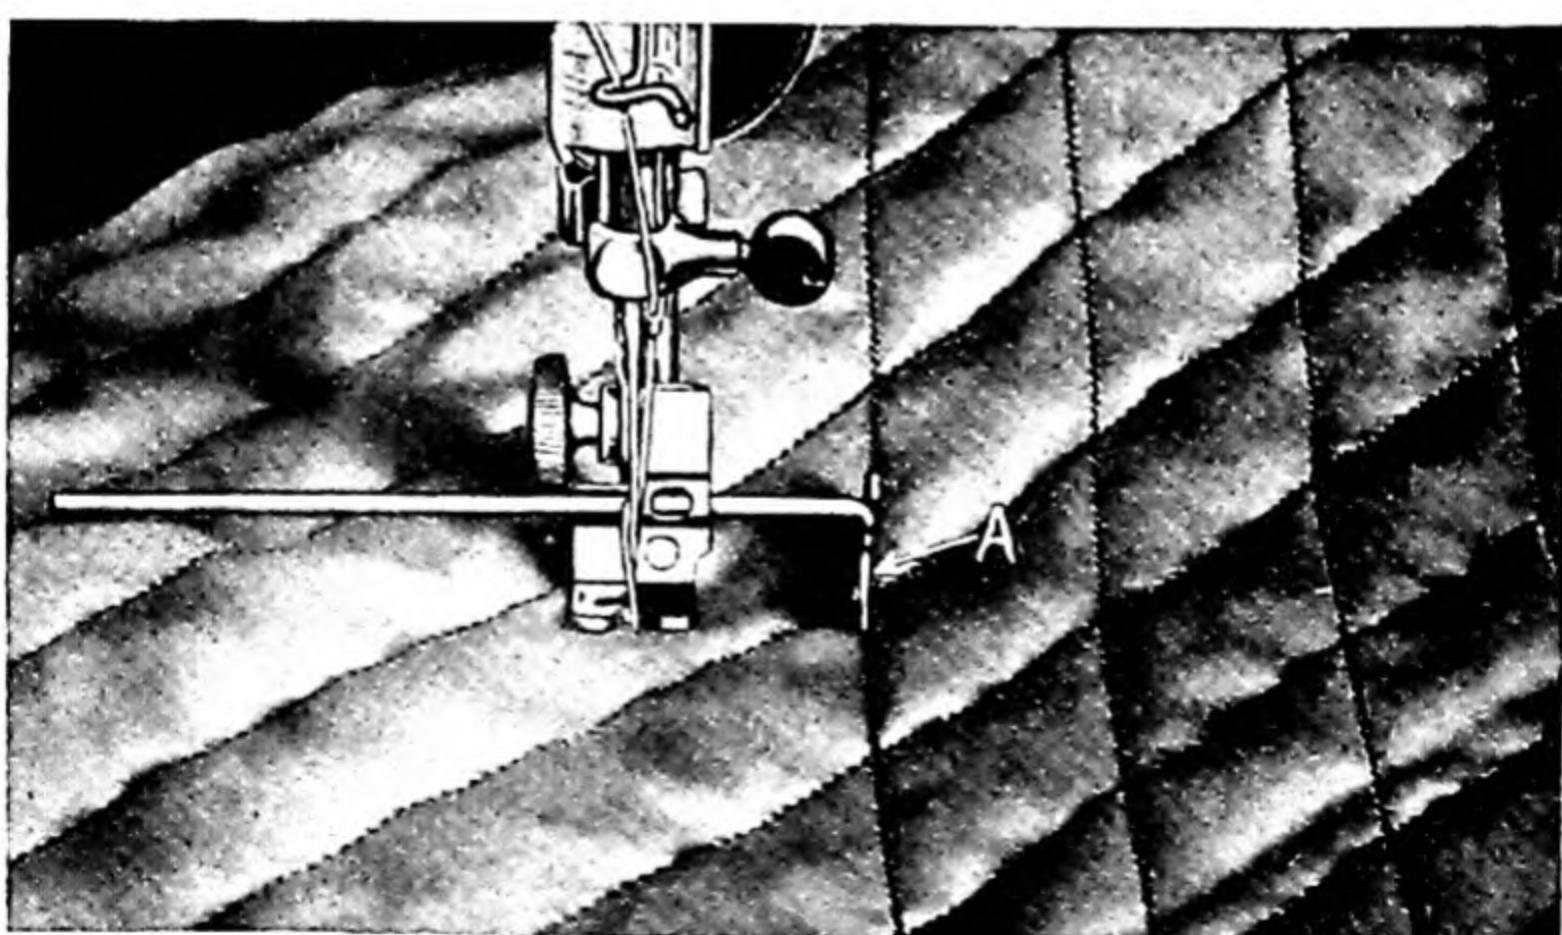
Quilter, attachment with gauge, useful for tucks and welt seams on skirts, as well as for regular quilting. If this type of movable gauge were attached to a zipper foot it would be wonderful. (© TSM Co.)
